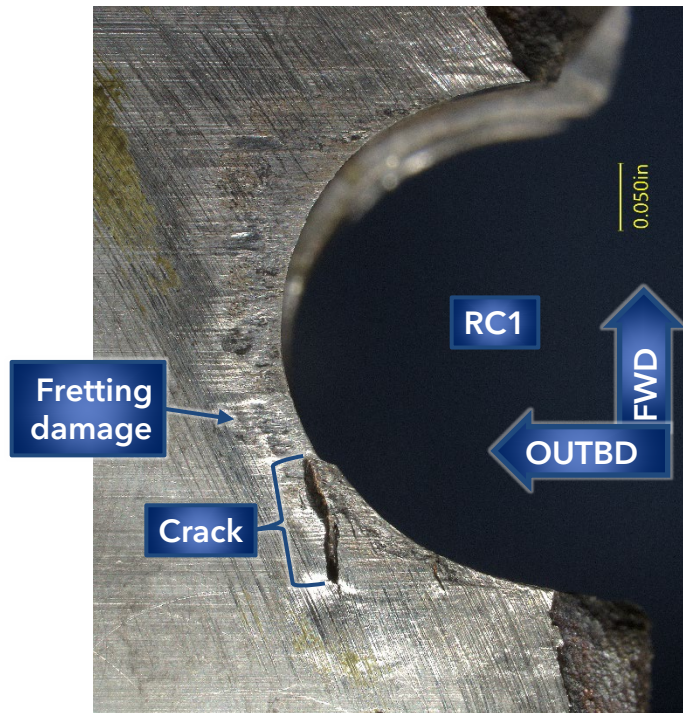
Closer view of the partially opened crack and fretting damage at the outboard side of hole RC1.
